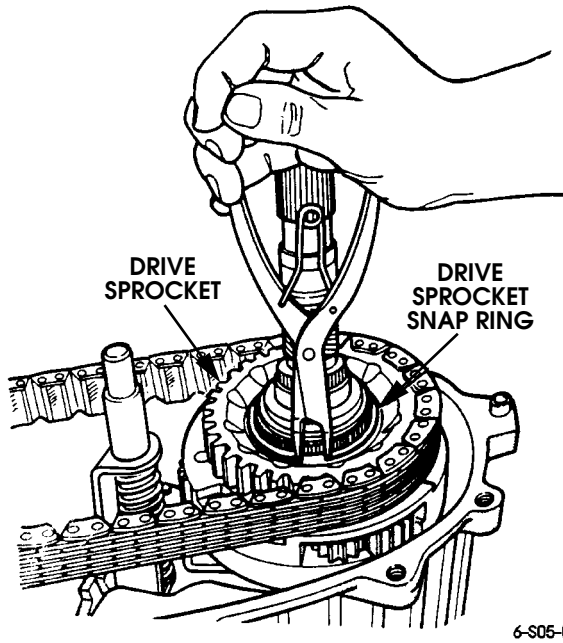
Drive Sprocket Snap Ring Removal/Installation
